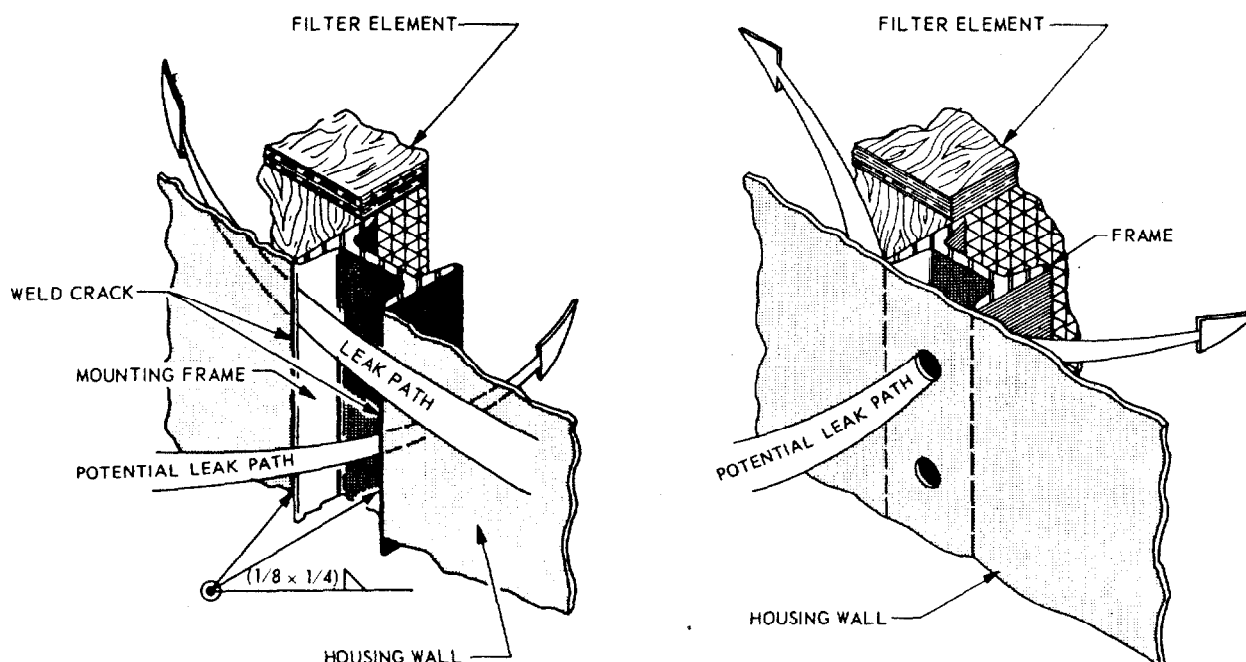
Methods of welding frame to housing to ensure that weld cracks result in inleakage instead of outleakage. In both installation methods, both legs of the I-beam are seal-welded to the housing. Because pressure inside the housing, both upstream and downstream of the filters, is below atmospheric pressure, a crack in either seal weld will result in inleakage to, rather than outleakage from, the housing.
